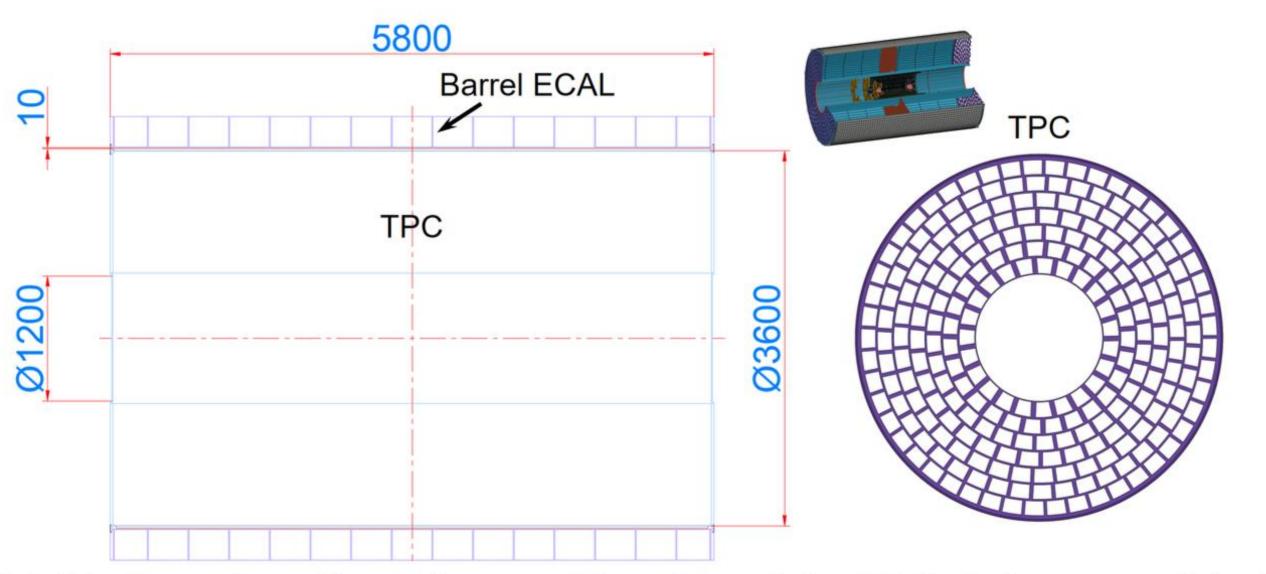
Boundary dimensions and location of the TPC. It is mounted inside the barrel ECAL with a minimum clearance of 10mm. (unit:mm)
